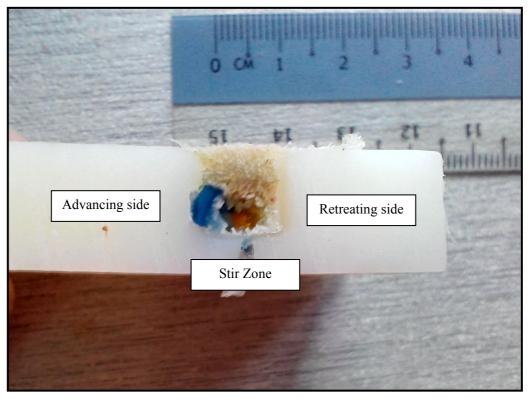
Cross-section of the butt weld joint at 35 mm/min
